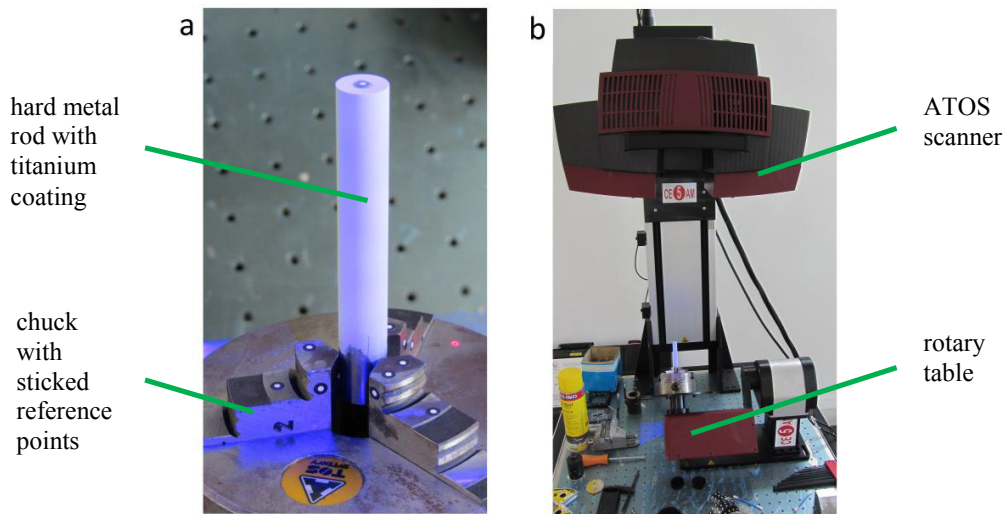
Configuration of equipment used in experiment; (a) hard metal rod coated with titanium powder clamped in chuck; (b) ATOS scanner and rotary table with chuck and measured rod.
